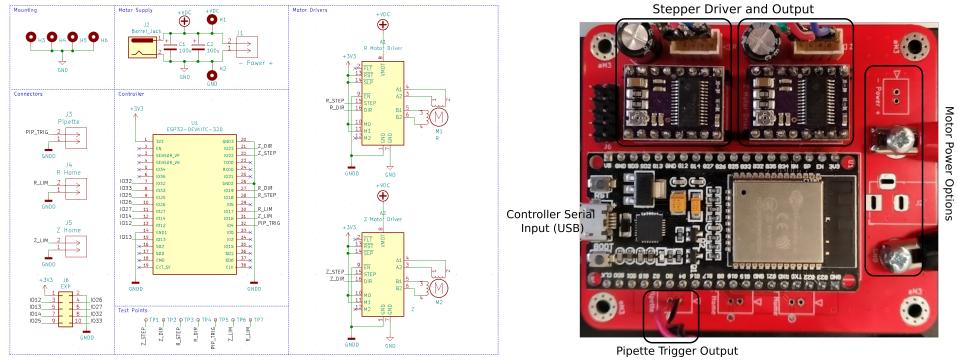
Left: Controller Schematic and Right: Constructed PCB
